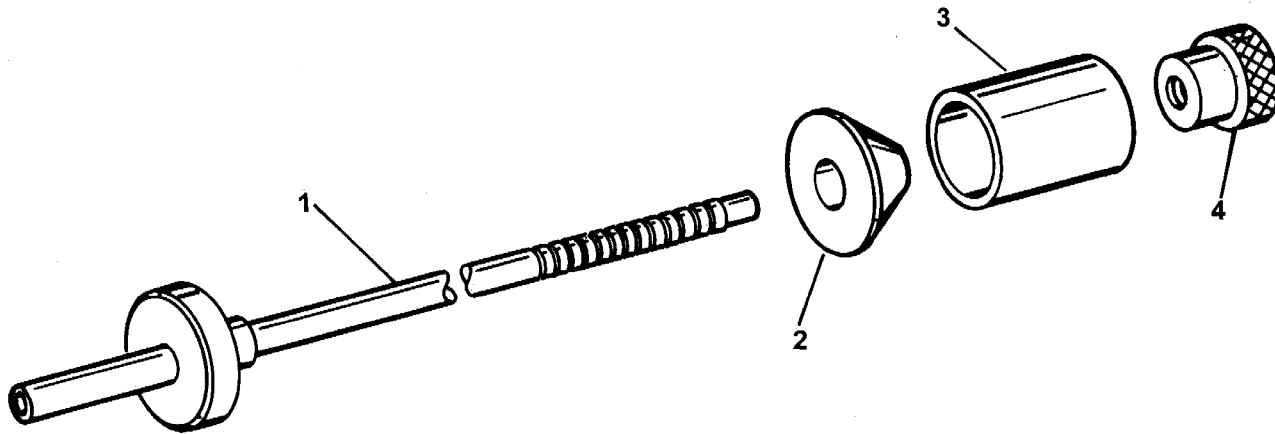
FIGURE Q - WORN GUIDE ALIGNMENT FIXTURE KIT
